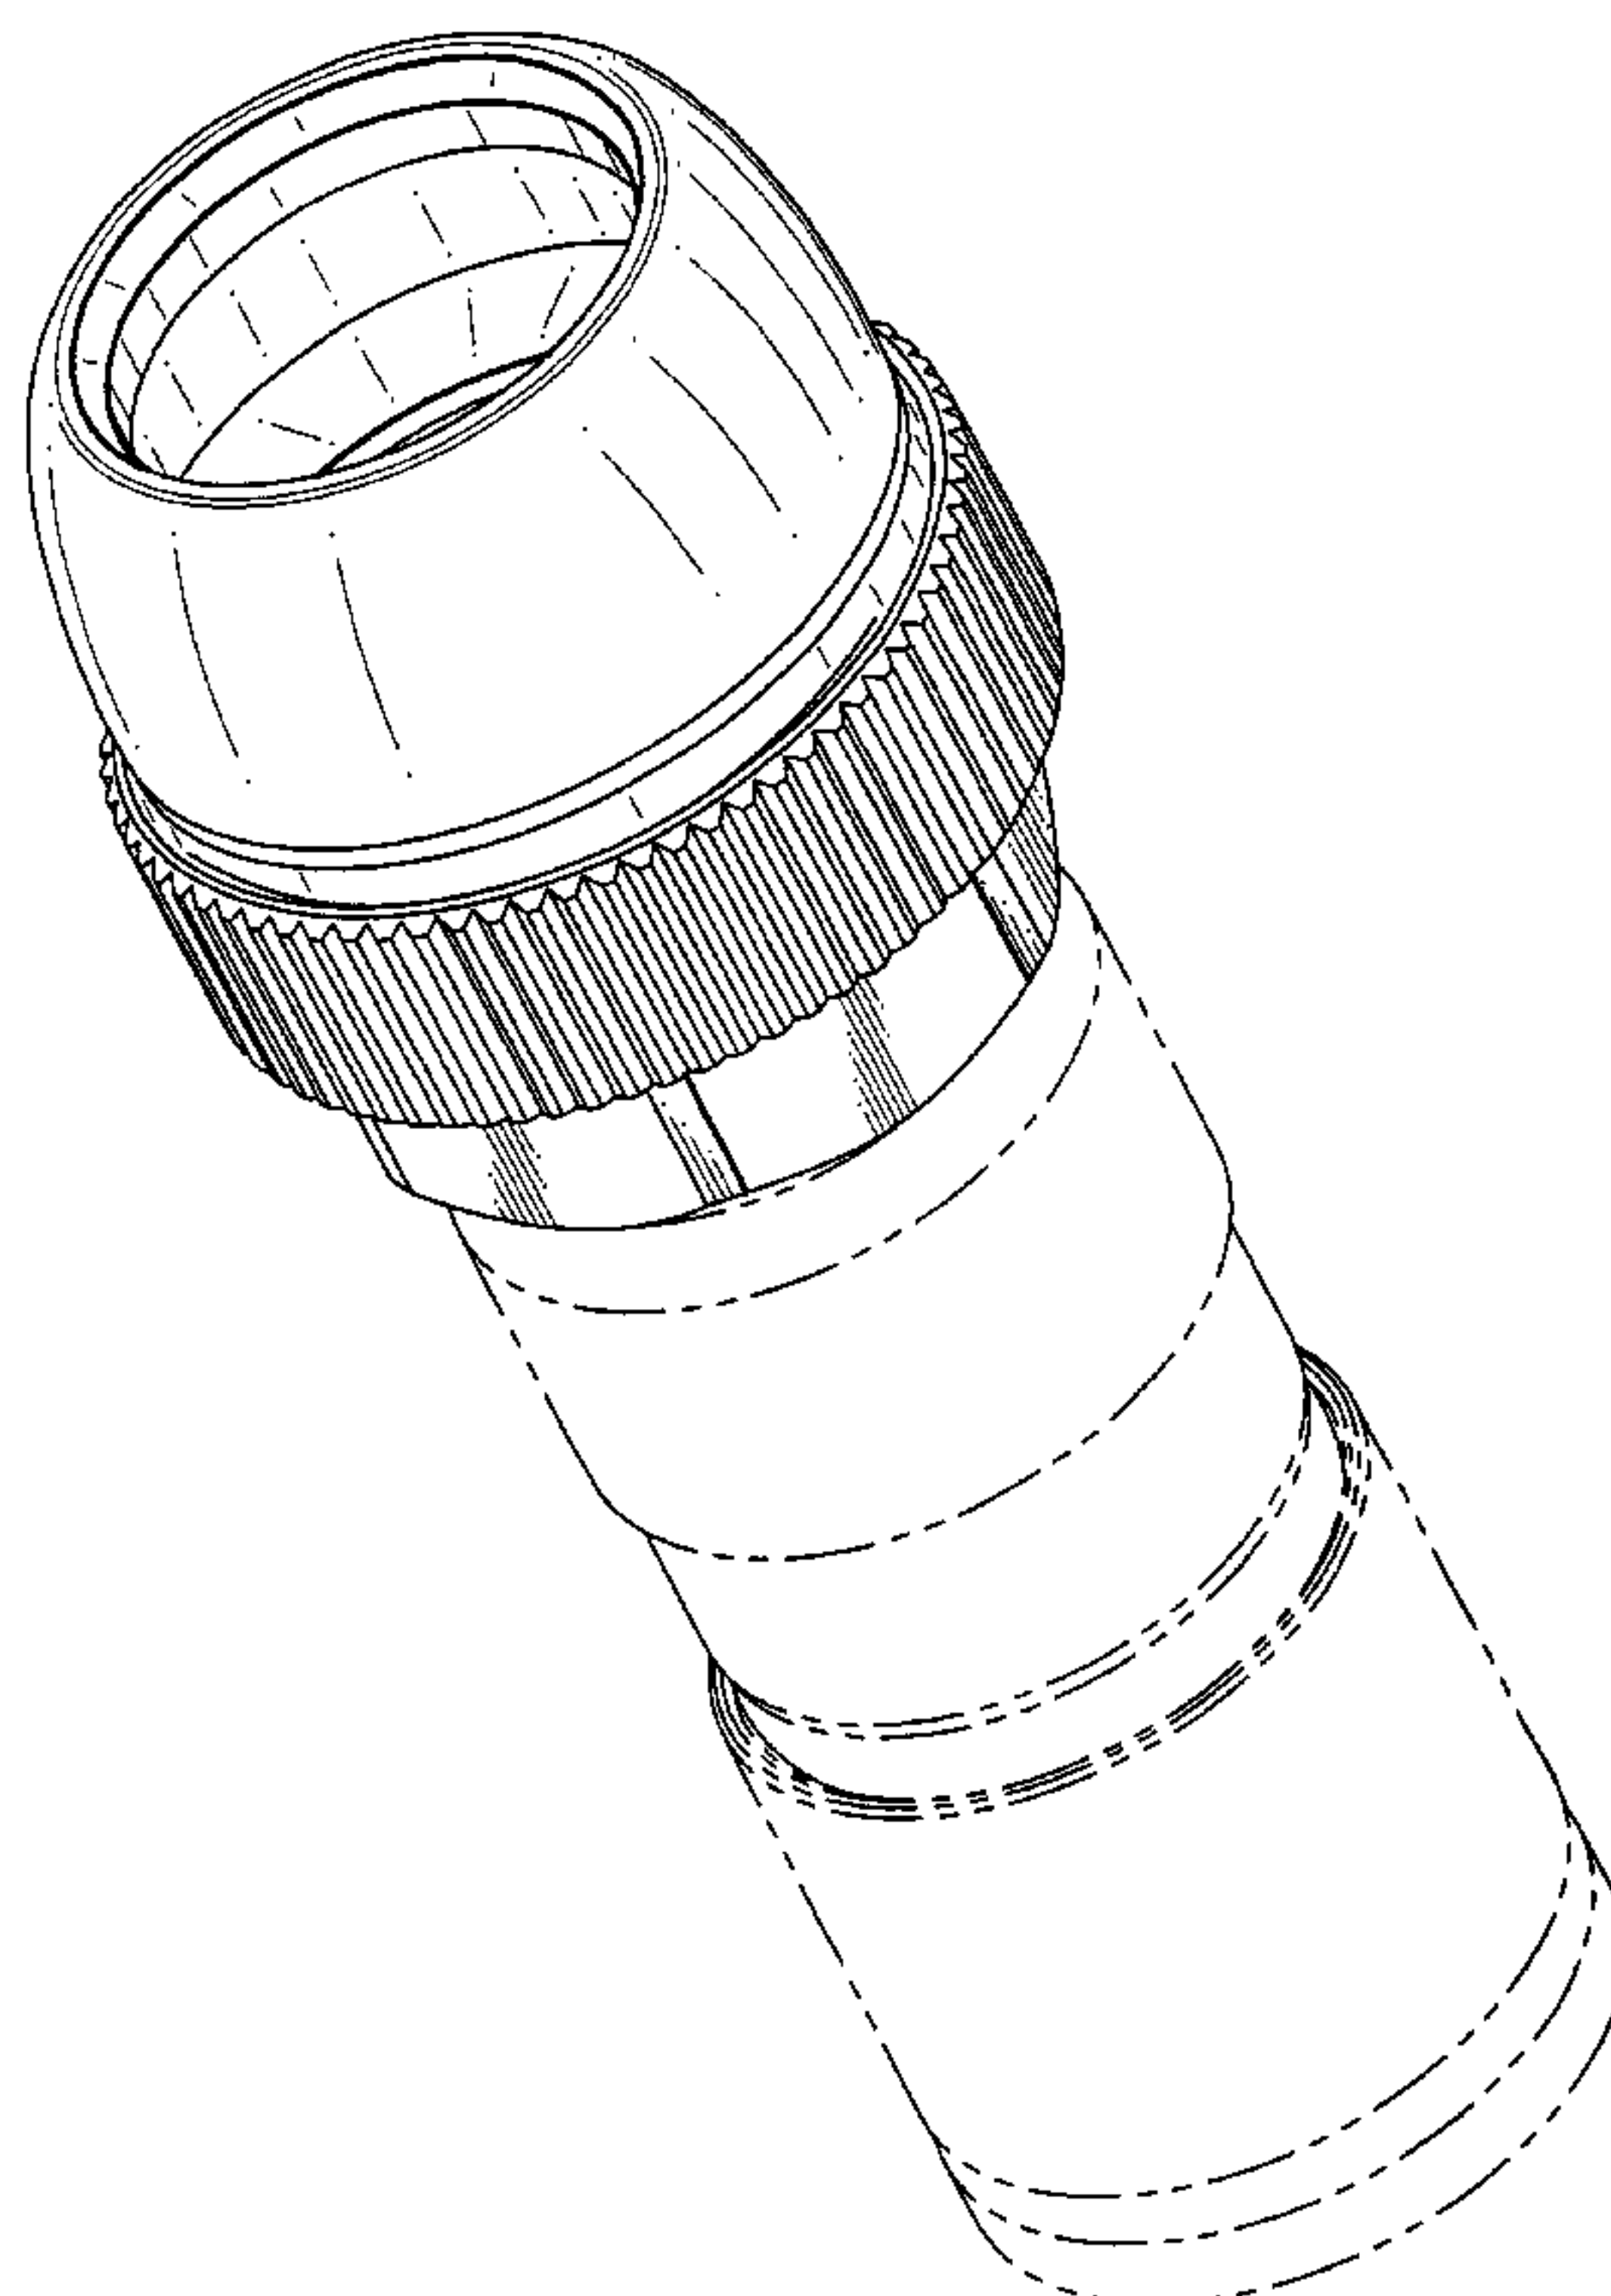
is a side view of the nut seal assembly for a coaxial connector, the other side being a mirror image thereof;
